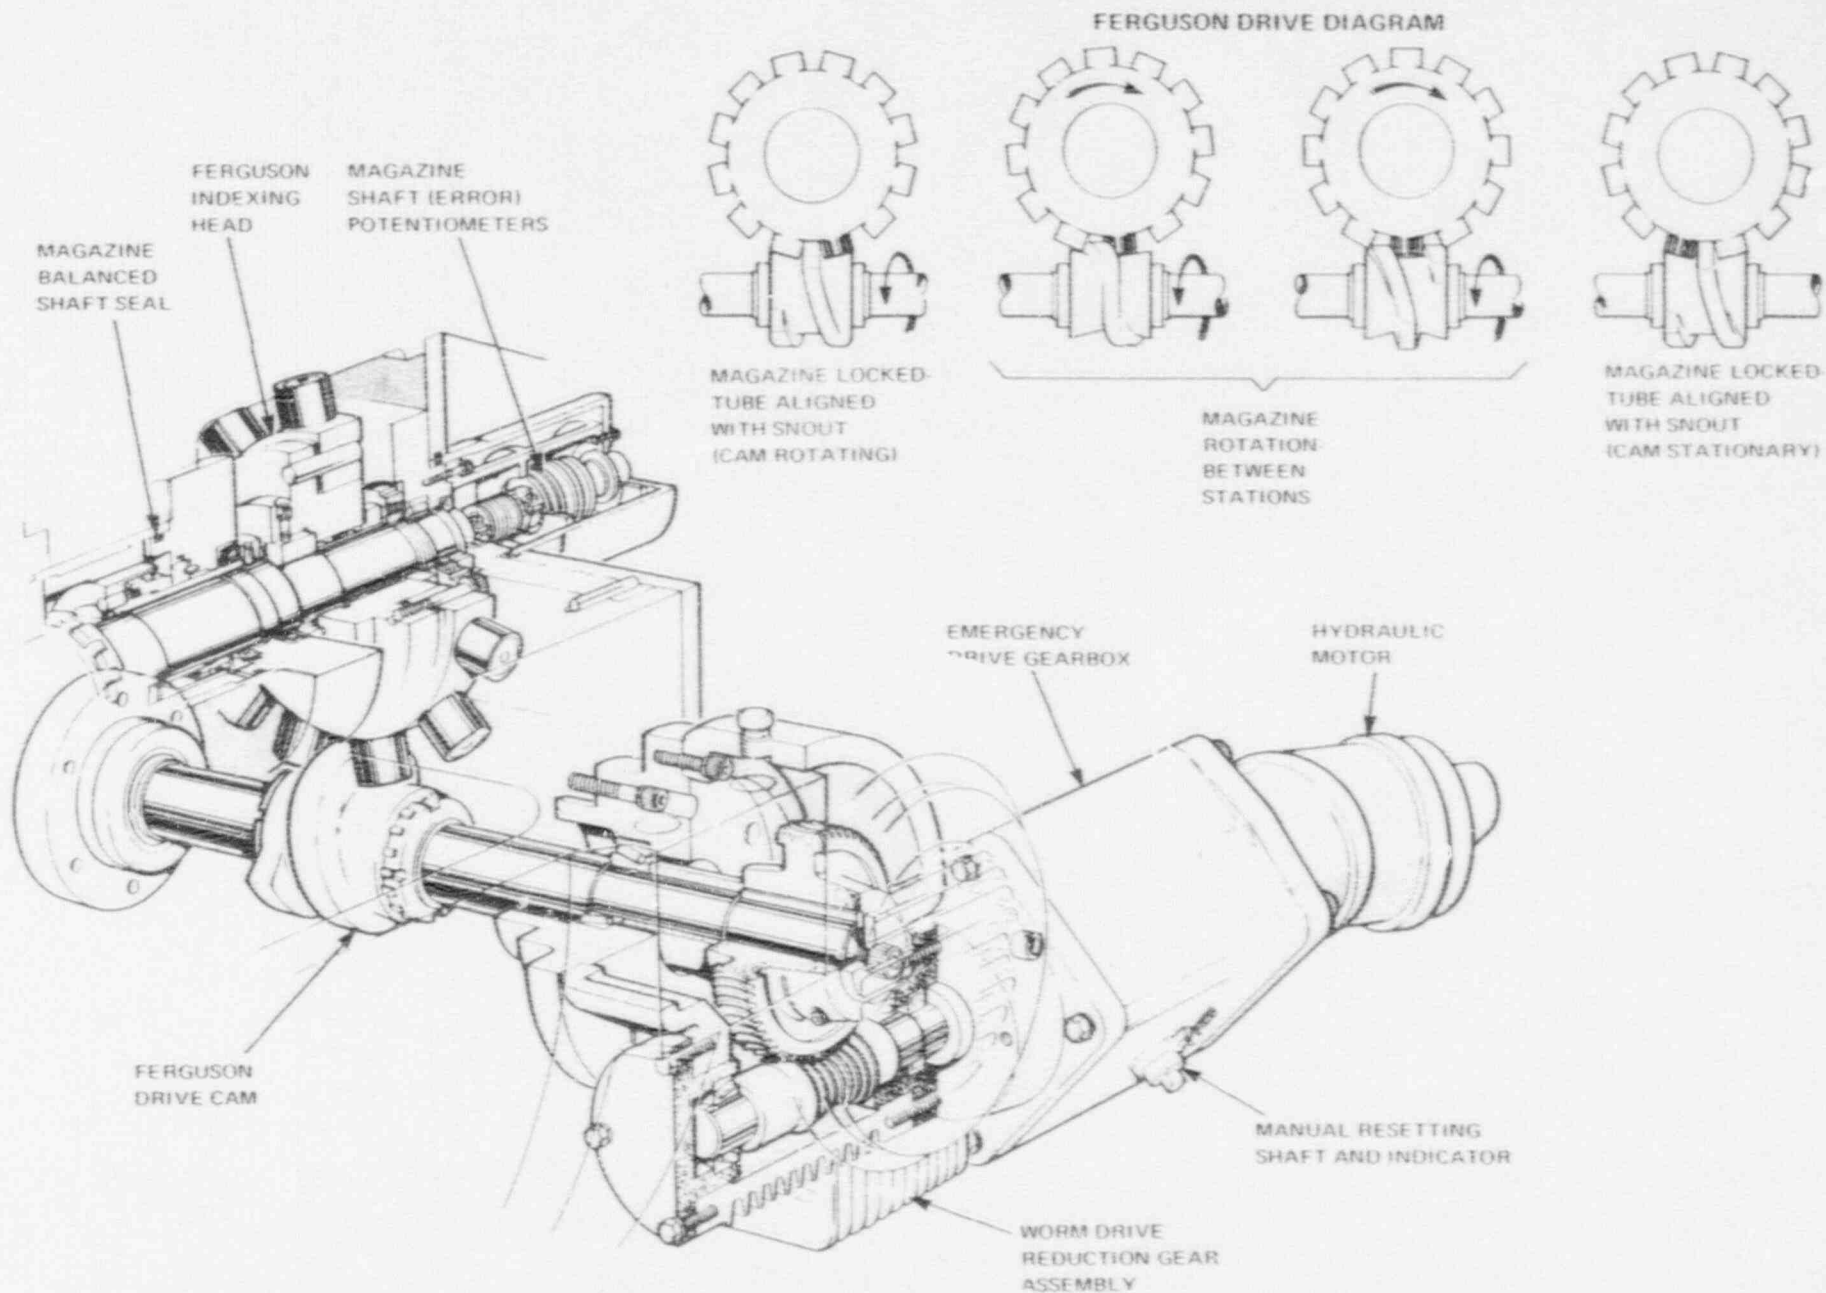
MAGAZINE DRIVE SYSTEM
